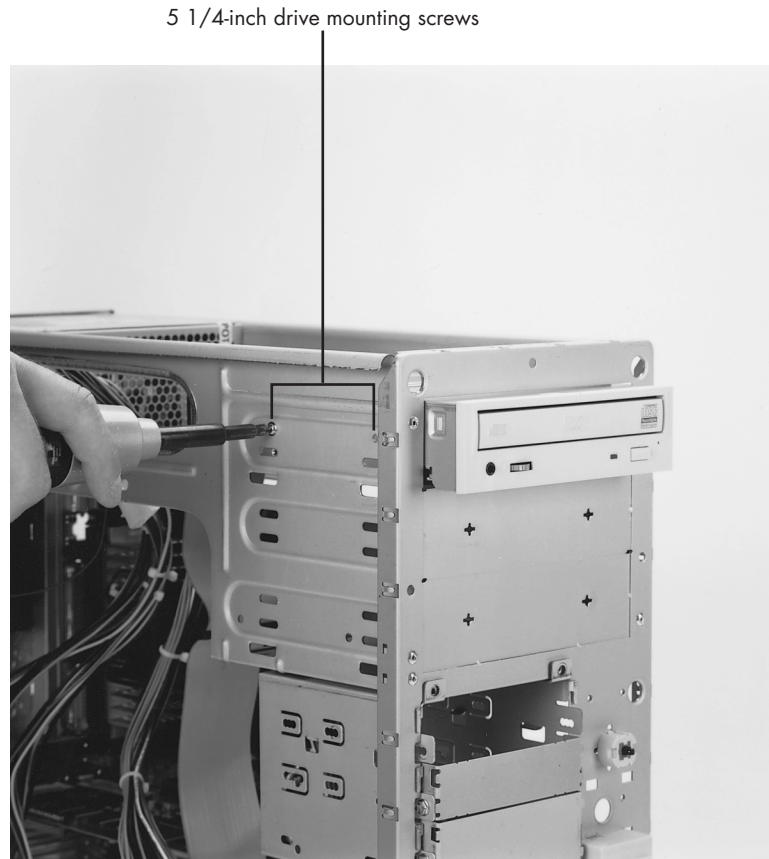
Secure the drive to the chassis using four screws. *Chassis courtesy of PC Power & Cooling, Inc. CD drive supplied by Micro X-Press.
